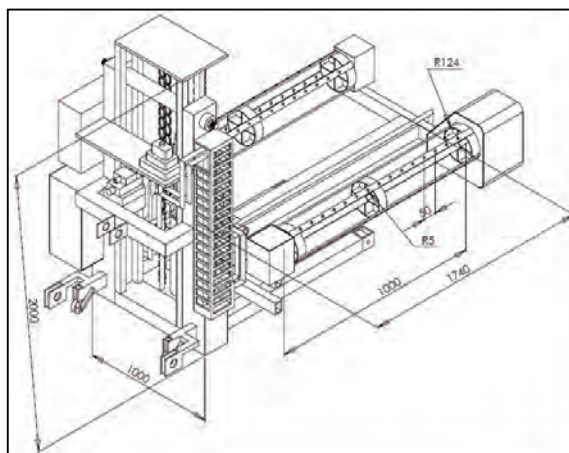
The isometric drawing of a Sugarcane Leaf Pruning Machine
